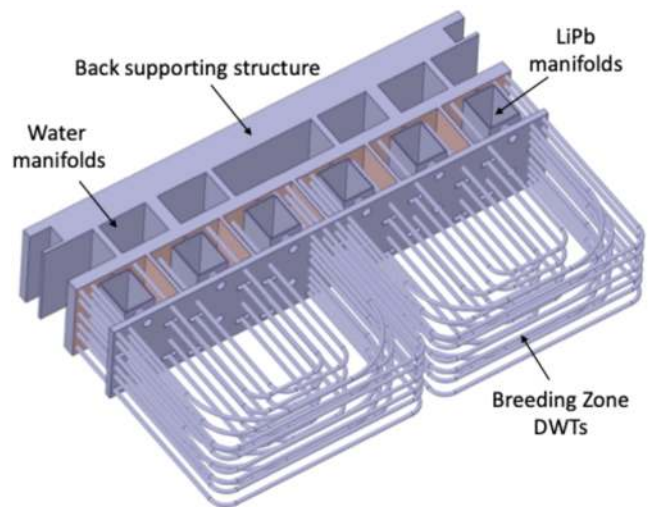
Perspective view of the outboard WCLL BB equatorial BU with 24 DWTs. The stiffening/baffle plates, FW, side walls and W armor have been removed to show the inner layout of the cooling system.
